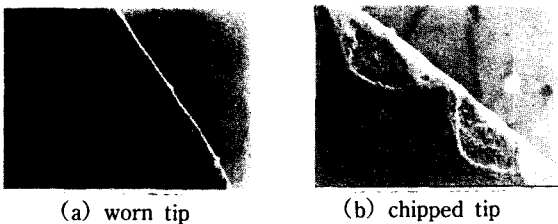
Worn or fractured insert tip of face milling cutter
